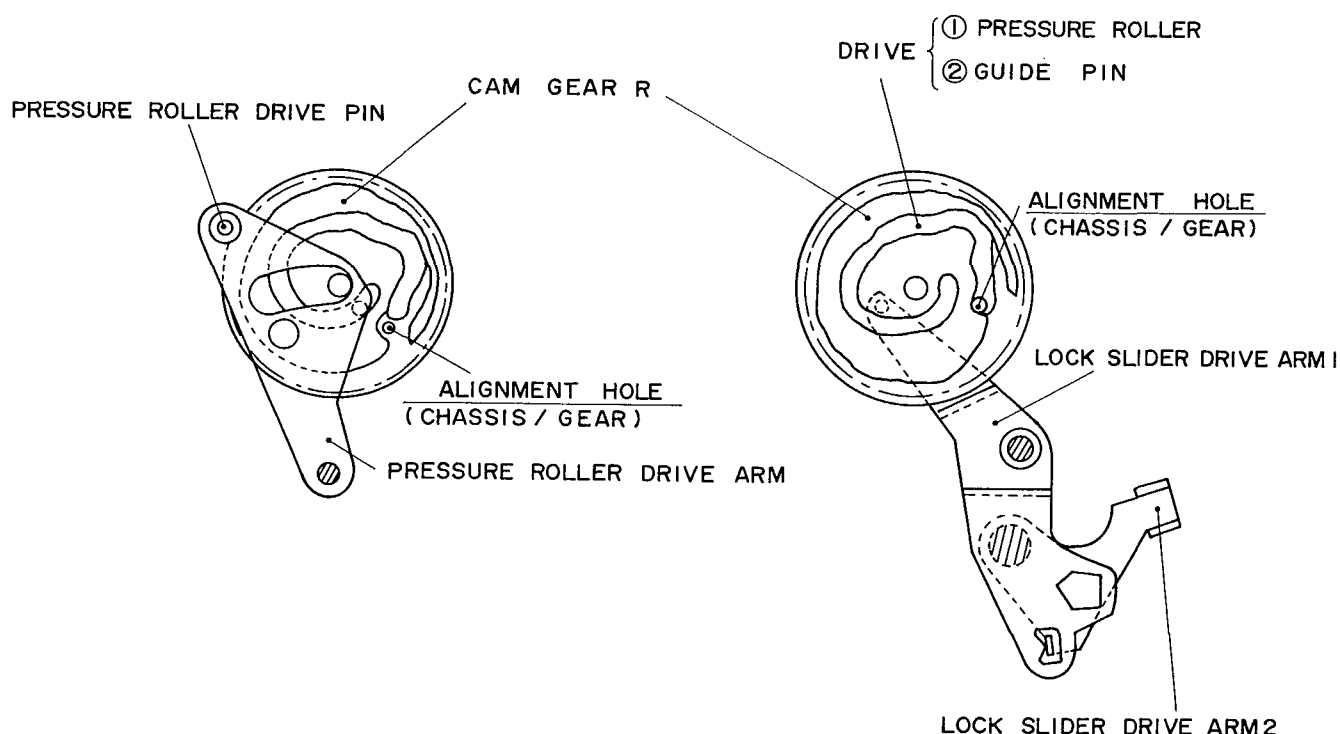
shows the pressure roller drive mechanism and lock slider drive mechanism. A cam groove is provided in the back of cam gear R (the surface that is in contact with the chassis) and the pin of lock slider drive arm 1 is inserted into the groove to be driven.
